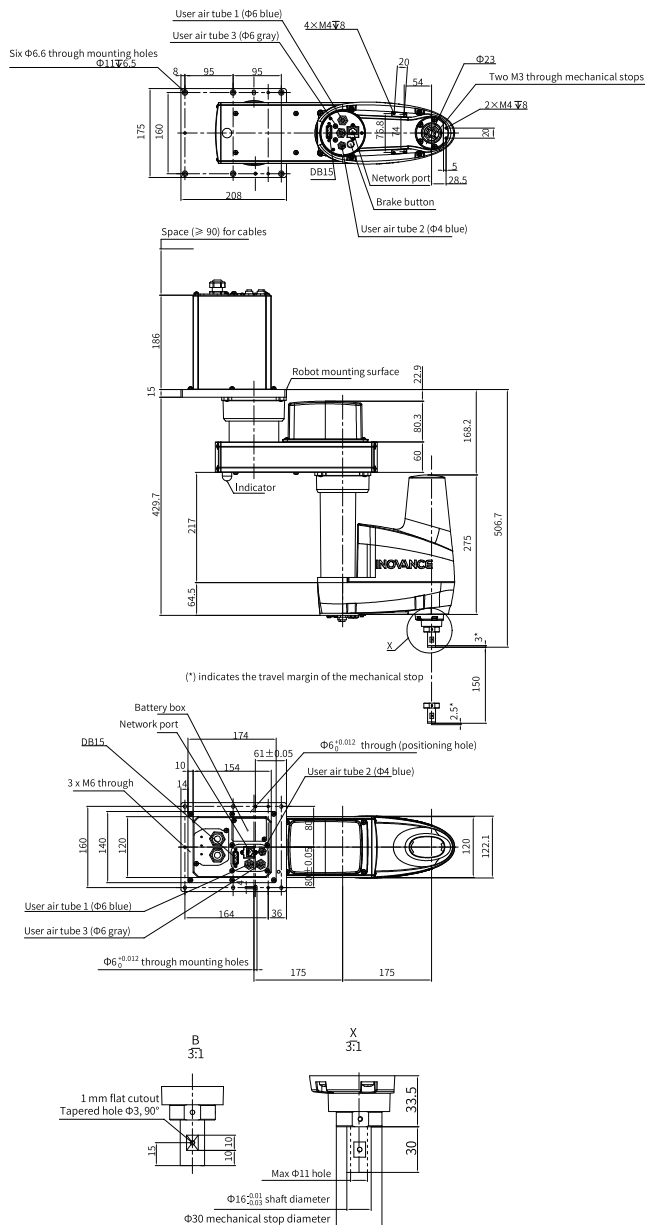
Outline dimensions for IR-TS4-35Z15S-INT (unit: mm)
